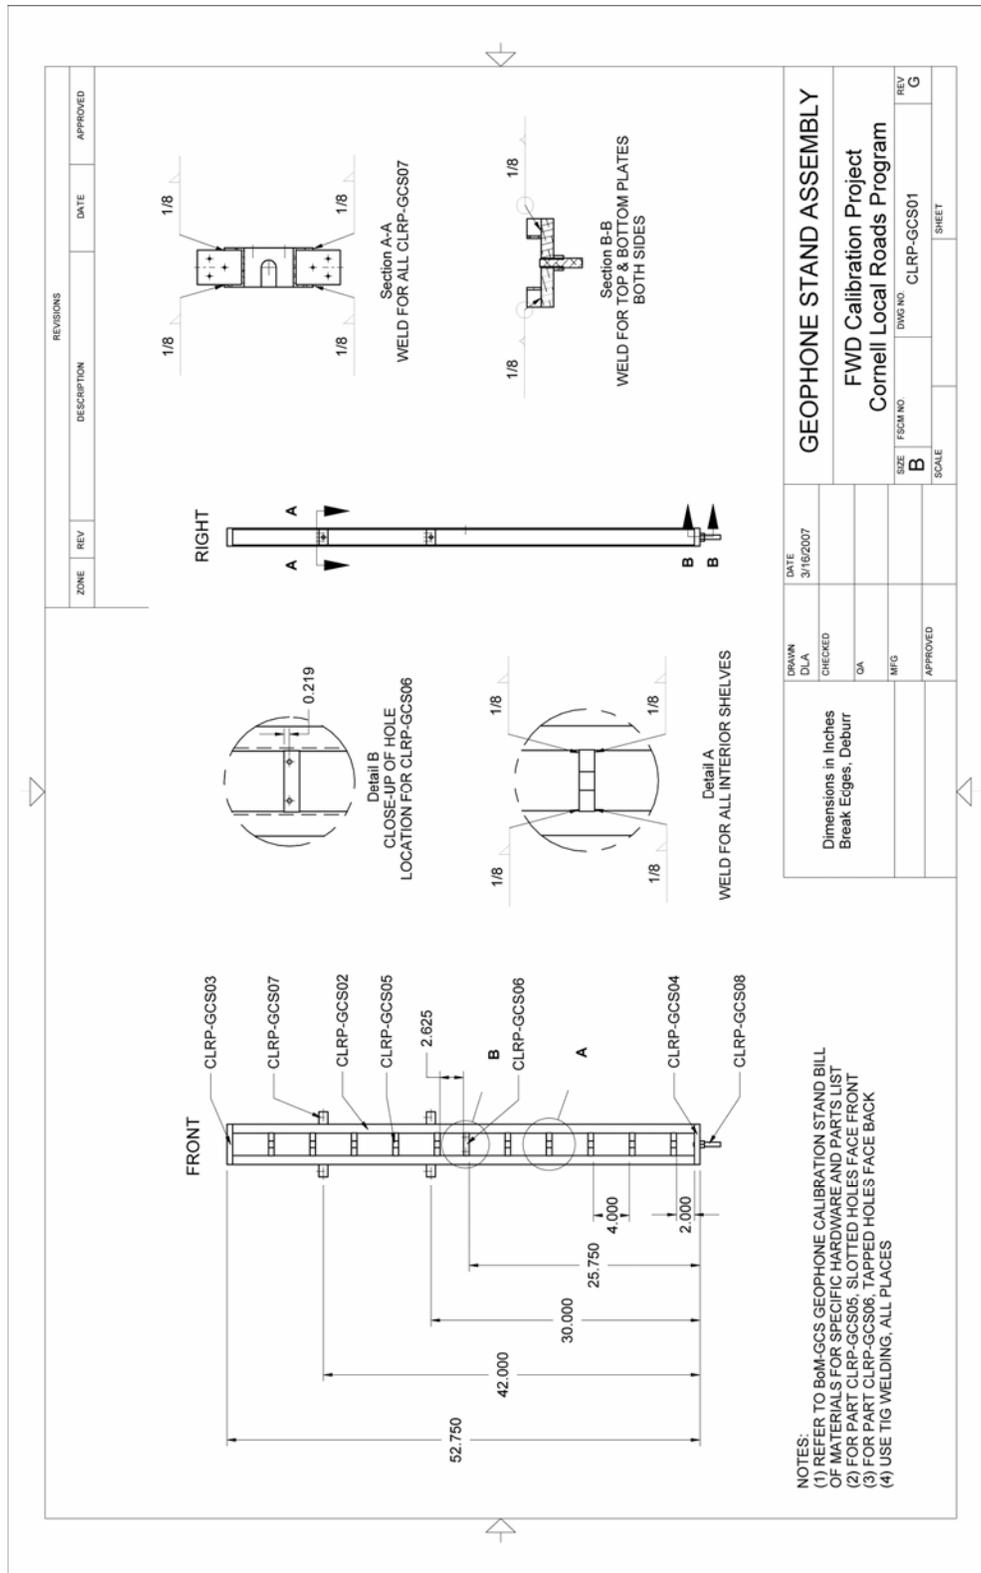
Drawing. CLRP-GCS01 Geophone Stand Assembly.
